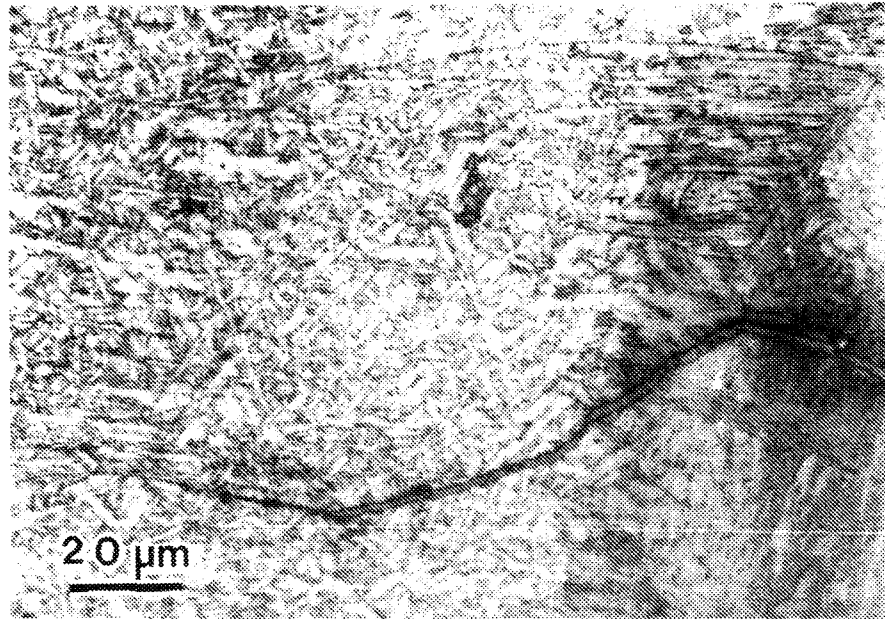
Crack Penetration in the Weld Metal
